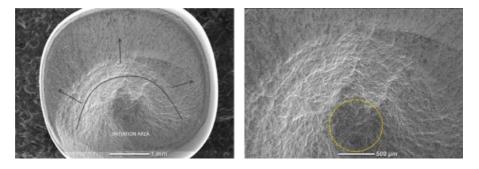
Opened fracture in a ball. Fatigue propagation.
